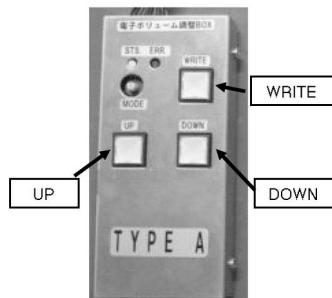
VCOM adjustment jig (RUNTZA059WJZZ)
